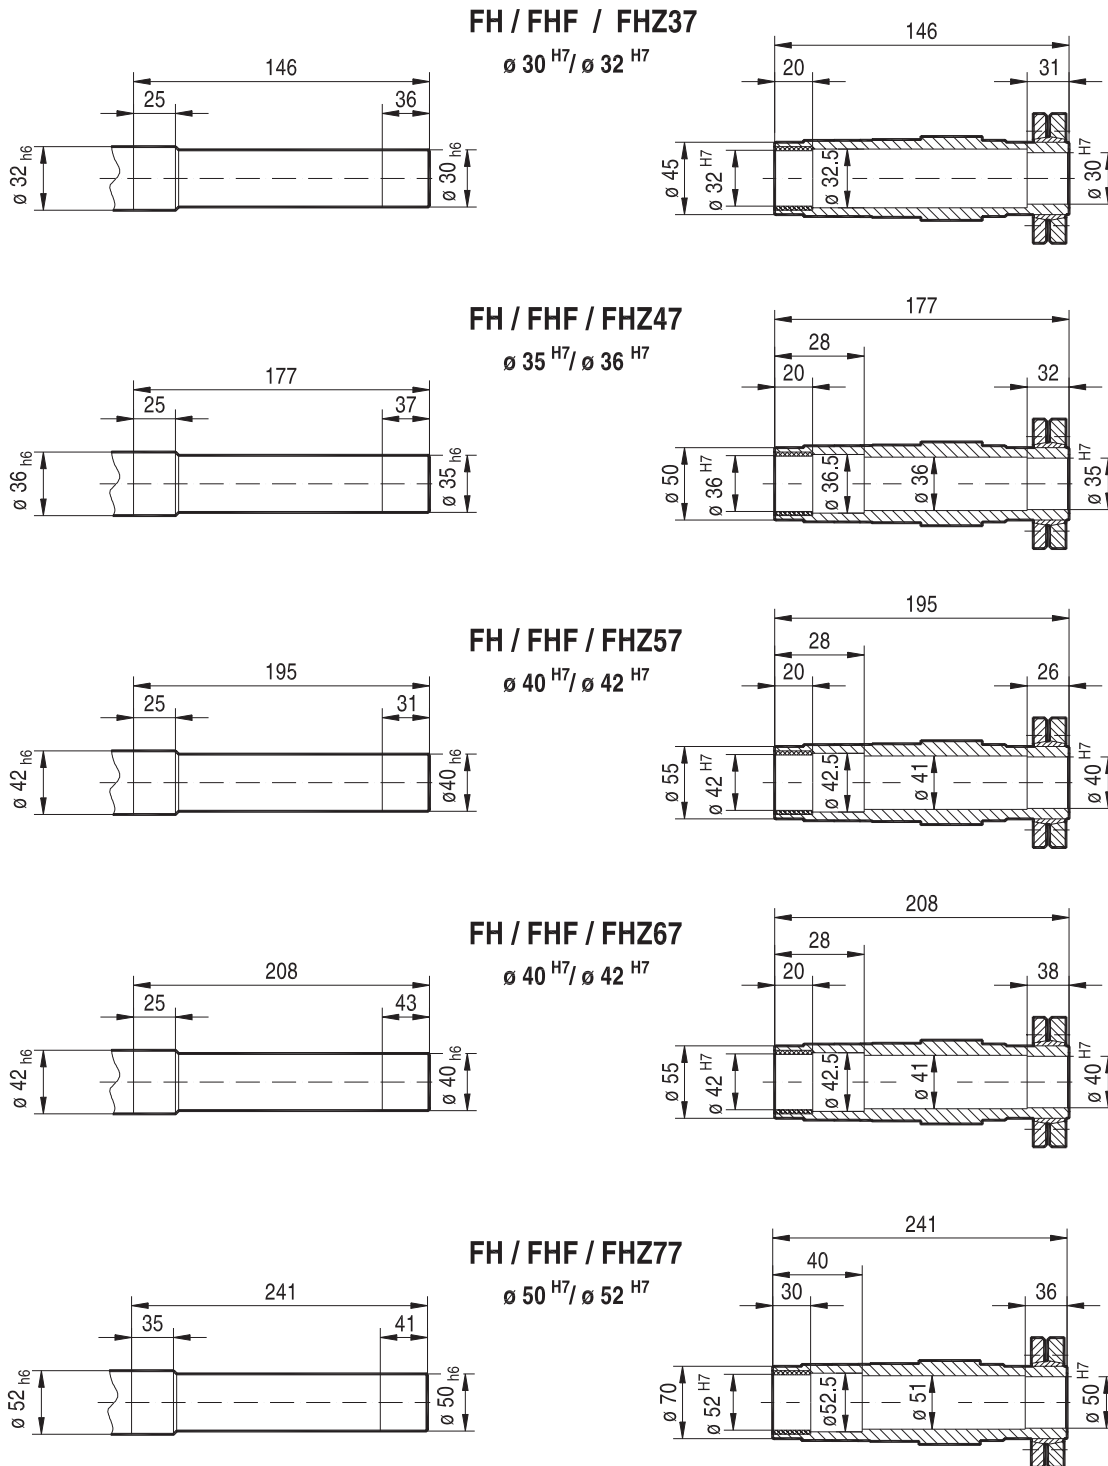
Shouldered hollow shaft FH/FHF/FHZ37...77
